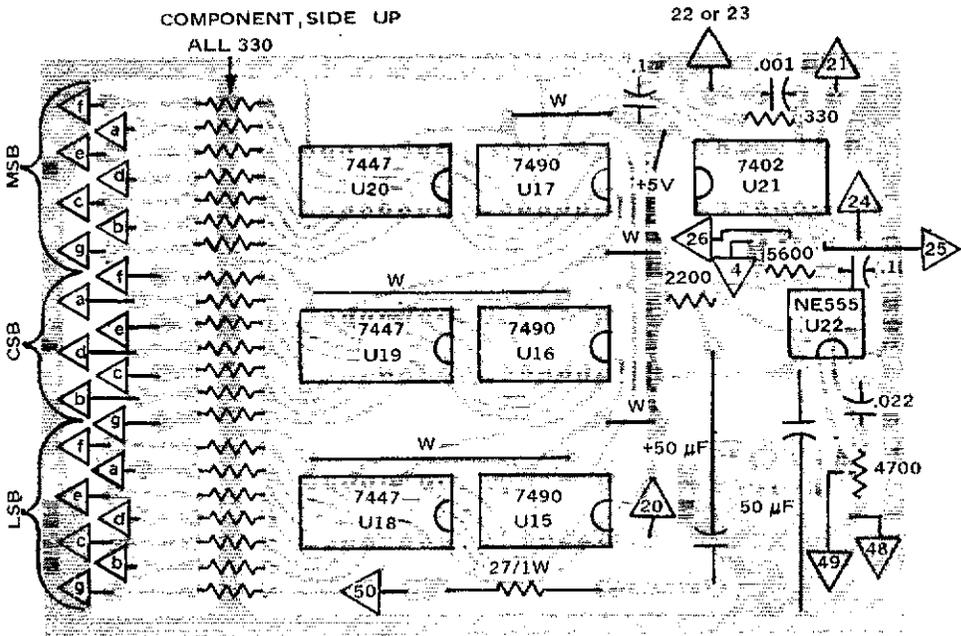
Etching pattern and component layout for driver board as seen from component side. W = wire jumpers. See Table I for wiring connections to other parts of the circuit.
